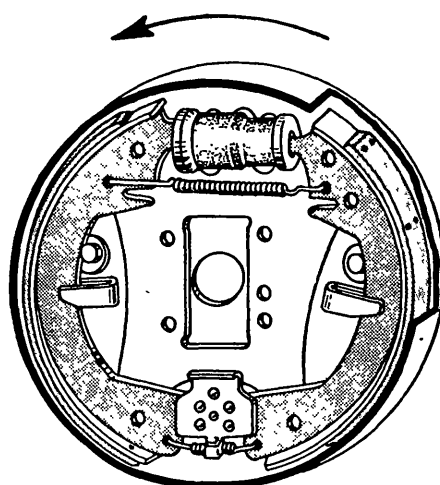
Bendix hydraulic floating anchor brake with an eccentric adjuster for each shoe. Right brake shown. Note that step bore cylinder is used with larger bore to the front. Rear brake cylinders have same bore
